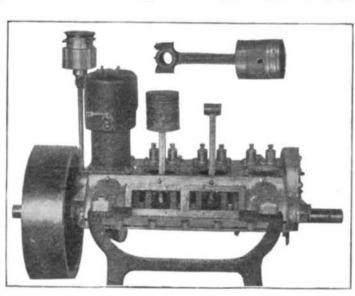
MOTOR PARTIALLY ASSEMBLED.
